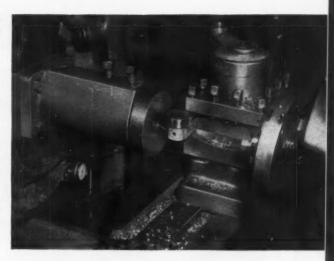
With this indexing workholder, gears of different diameter can be rapidly and accurately inspected on a variable center distance fixture.
